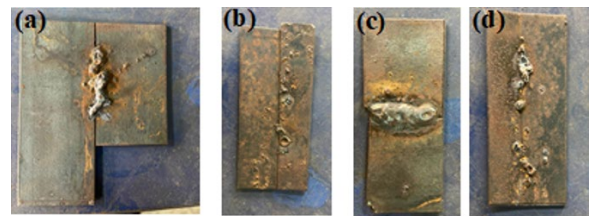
Welded joints using various samples (a) Sample 4 (b) Sample 6 (c) Control sample (d) Sample 1
